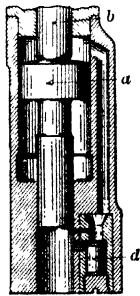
Cylinder and Valve of "CC Stopehamer."
